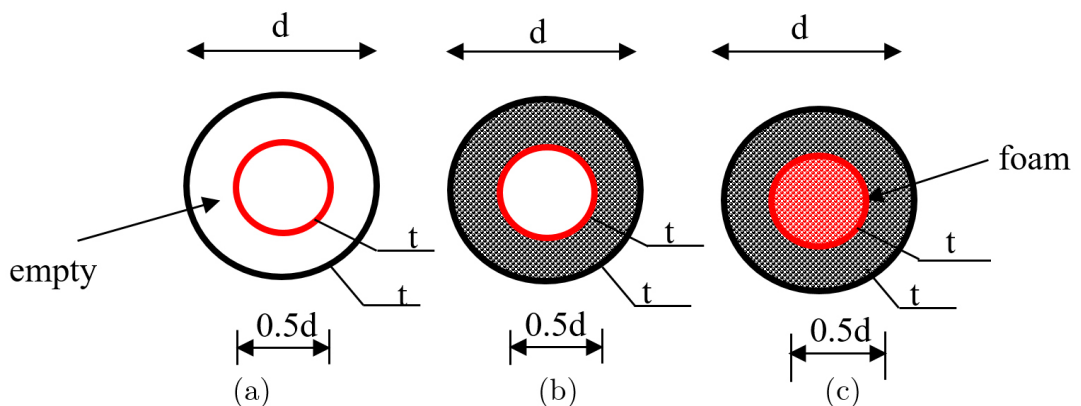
Cross-section of the circular tubes (a) empty double tube, (b) foam-filled double tube, and (c) full foam-filled tube.
